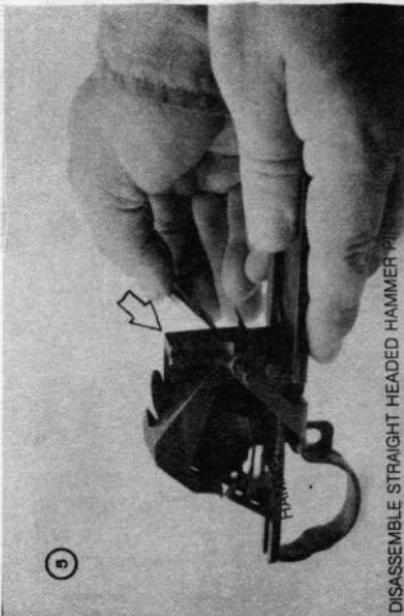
Disassembly / assembly of trigger housing assembly (1 of 4).
